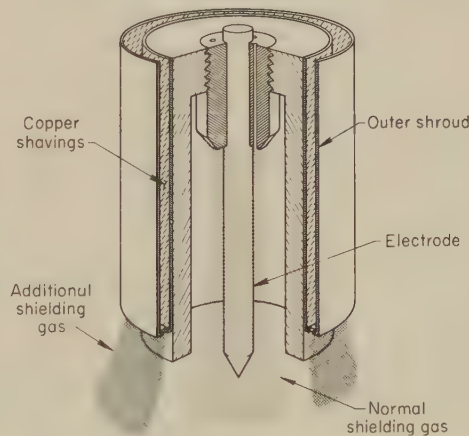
Sectional view of a torch nozzle equipped with an outer shroud containing copper shavings to provide additional gas shielding for manual inert-gas welding
